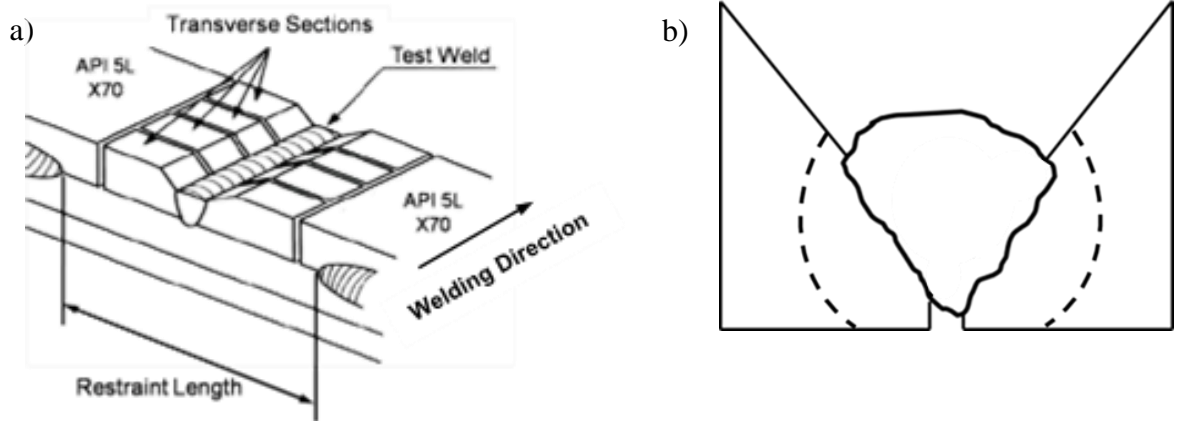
a) Extraction of test weld. Adapted from (Cannon 2009),
